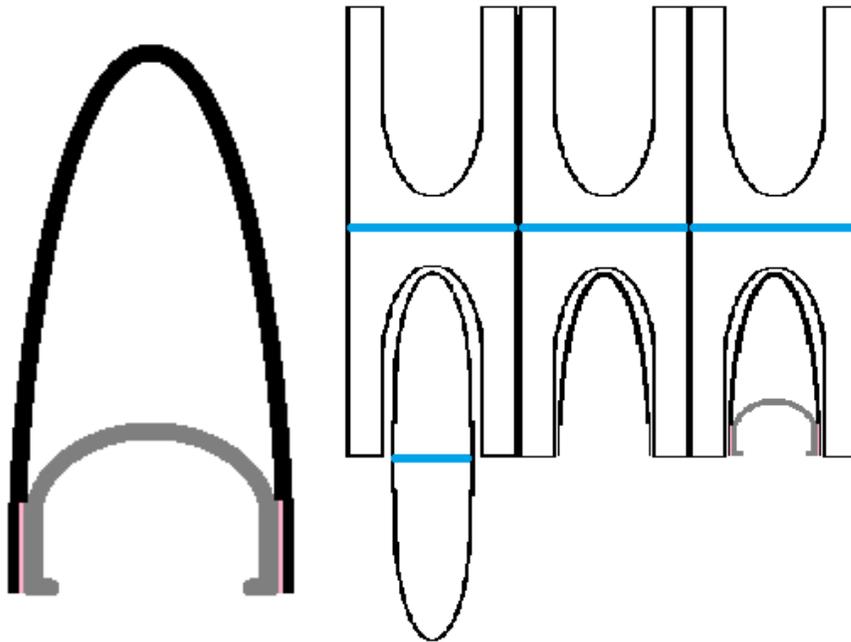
to the left, a cross section of the finished rim with both components joined. To the right, the different steps in the coil; roll forming the inner rim, coiling the inner rim, inserting the rim well into the coil. The right drawing shows the cross section of rollers in parallel, which help form the coil and keep the rim in place for precise joining of the two components. The blue lines represent the axis of the rollers.
